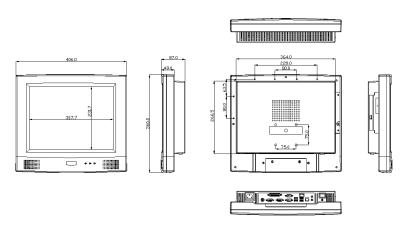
LP 1500 BACK MODULE ASSEMBLY
